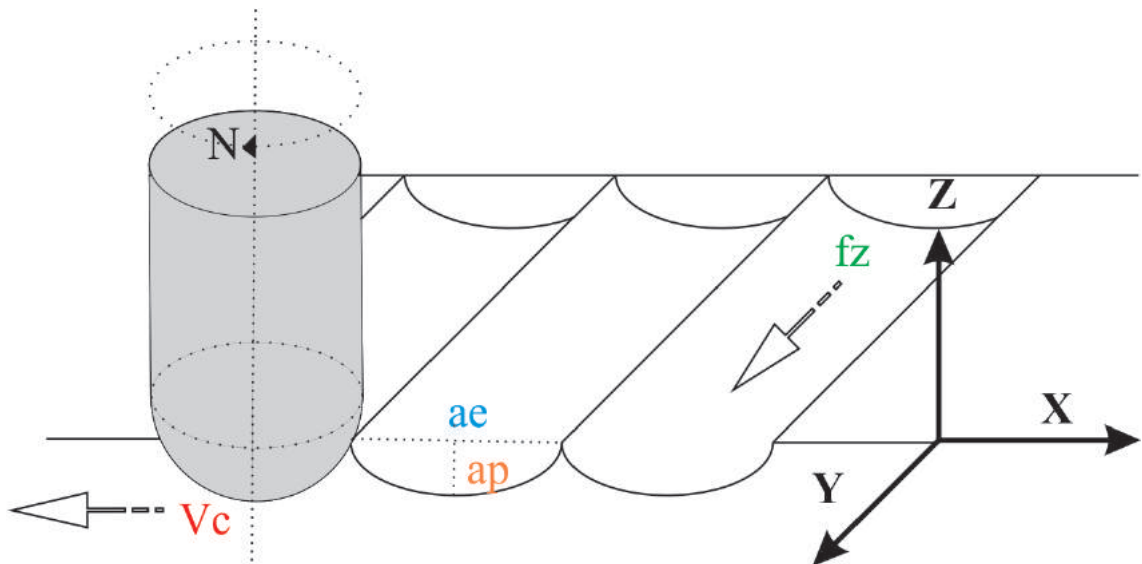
Schematic representation of the fundamental machining parameters for ball nose finish end milling.
